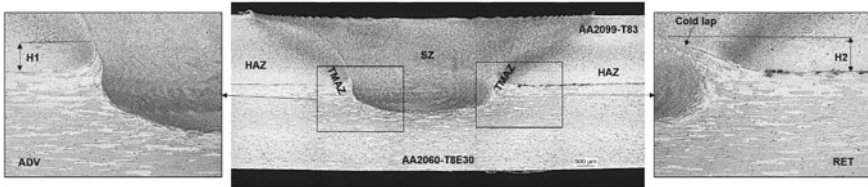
Cross-section of FSW lap joint produced at 1200 rpm and 250 mm/min by a tool with three flats
